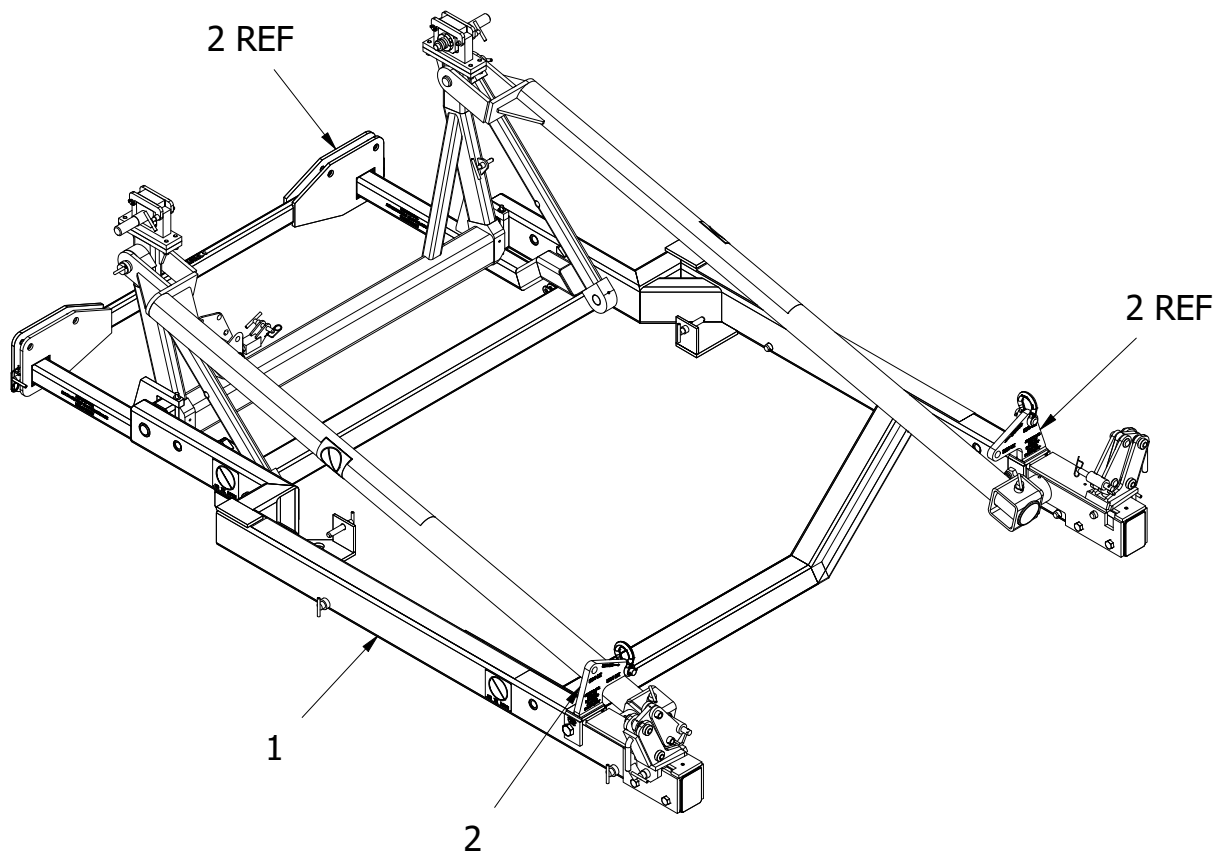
AM-1928-156-80C2-B Cradle Assembly with Bootstrap Adapters for CF6-80C2
